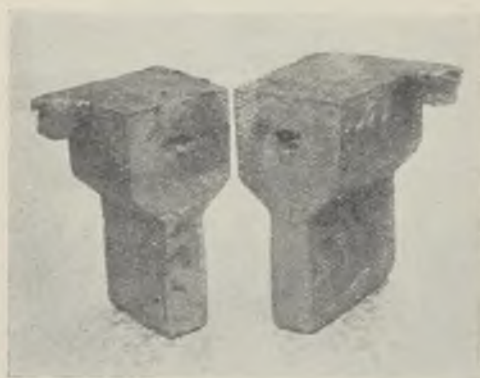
SECTION OF "KEEL"-TYPE TEST-BLOCK WITH PIPE FORMED THROUGH CENTRE.
